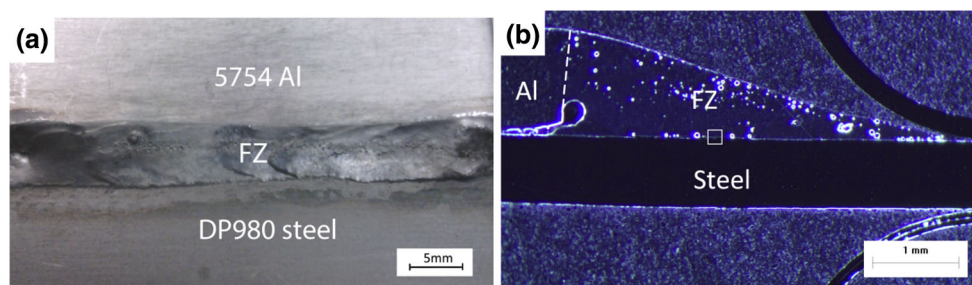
Typical weld appearance and cross section of laser Al/steel joint at 2.6 kW laser power and 0.3 m/min travel speed: (a) weld appearance, and (b) cross section
